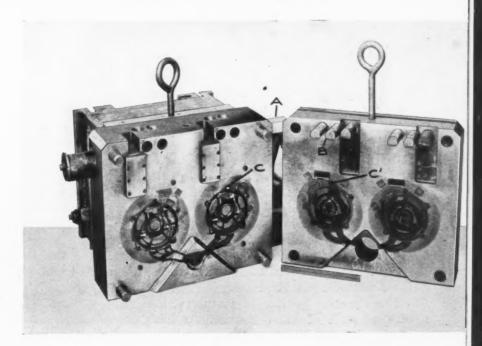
Two-cavity die used to produce part shown in Fig. 14. This die is an excellent example of how advanced tool design can be employed to facilitate production of complex parts.
